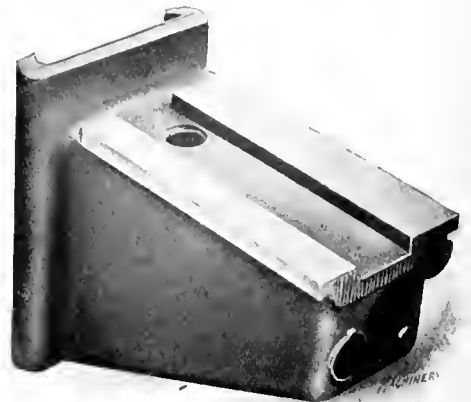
Solid Top Extended Knee with Confined Guide Bearing for Saddle
